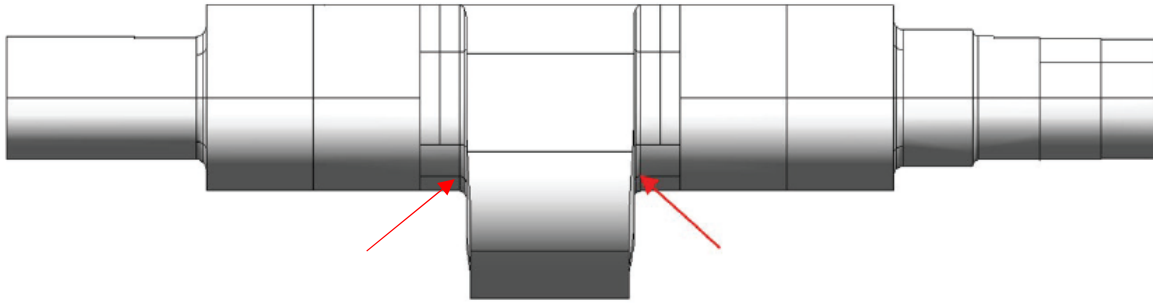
Areas in which the fatigue cracks start appearing, ultimately causing shaft failure [3]
